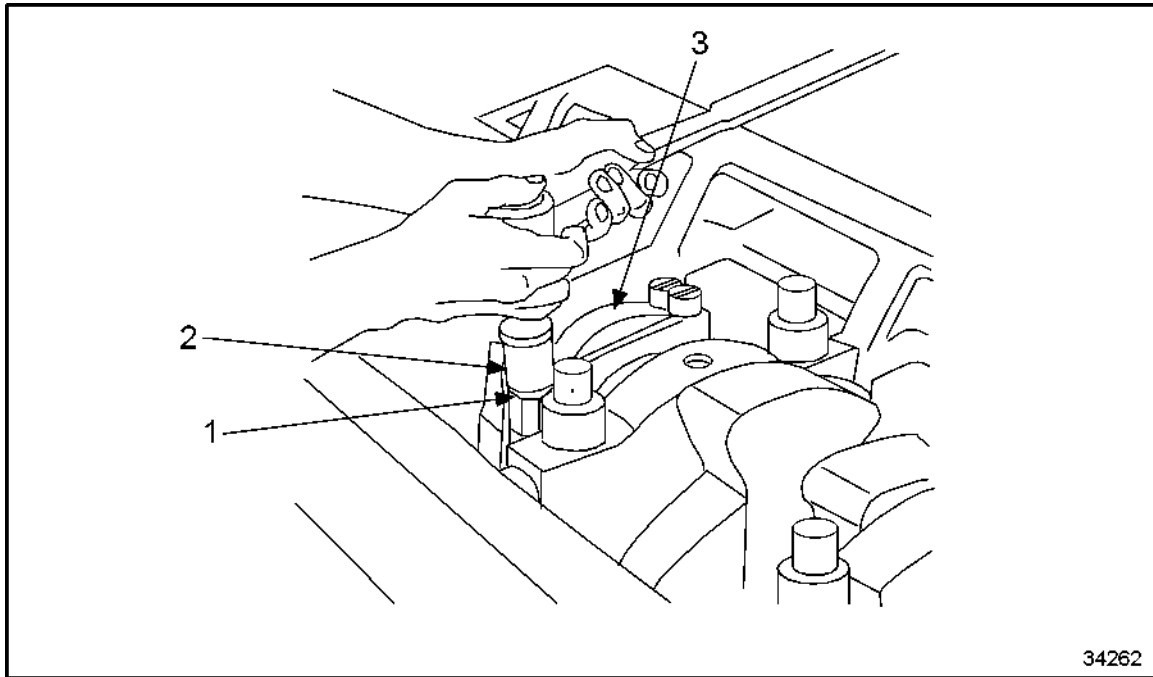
Release Connecting Rod Bolts Through Inspection Port
